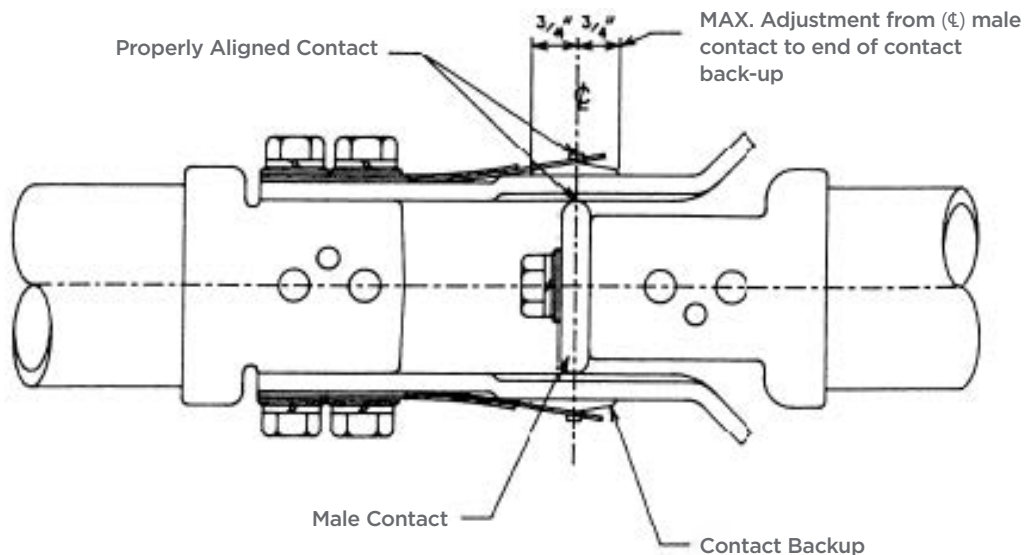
JAW CONTACT TOLERANCES
